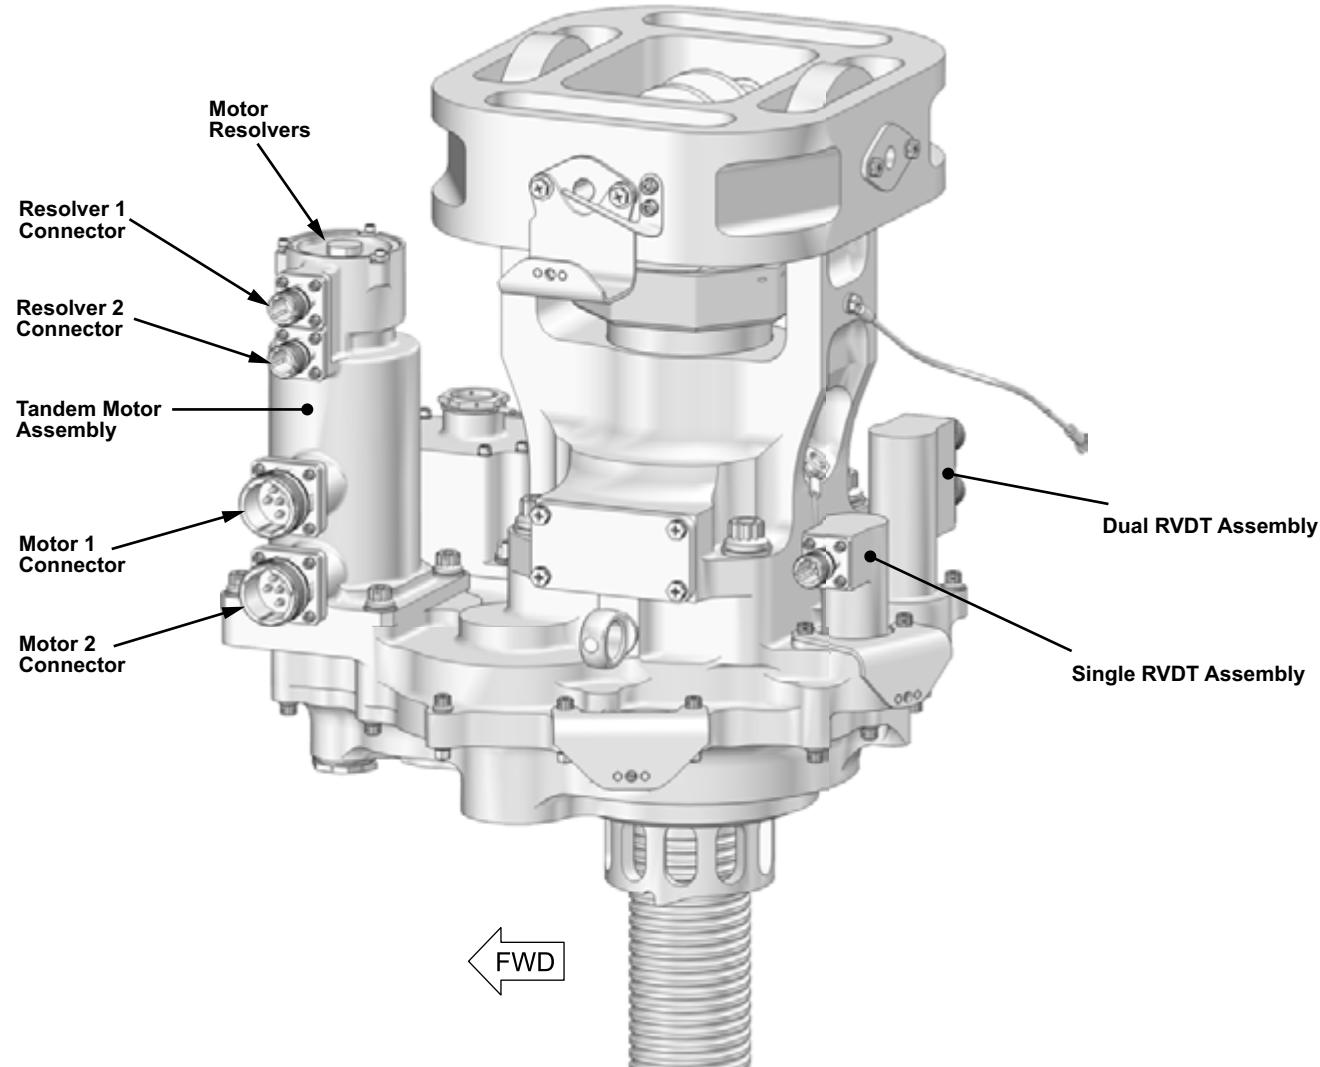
HSTA Tandem Motor Assembly and RVDTs
